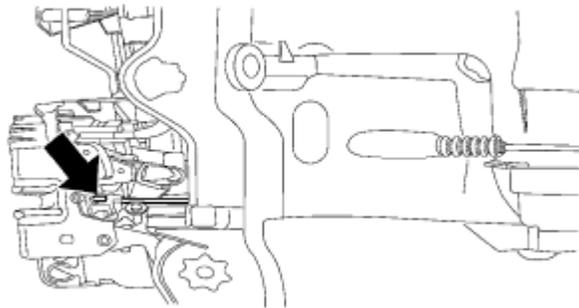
Disconnecting/Installing Interior Handle Lock Rod
